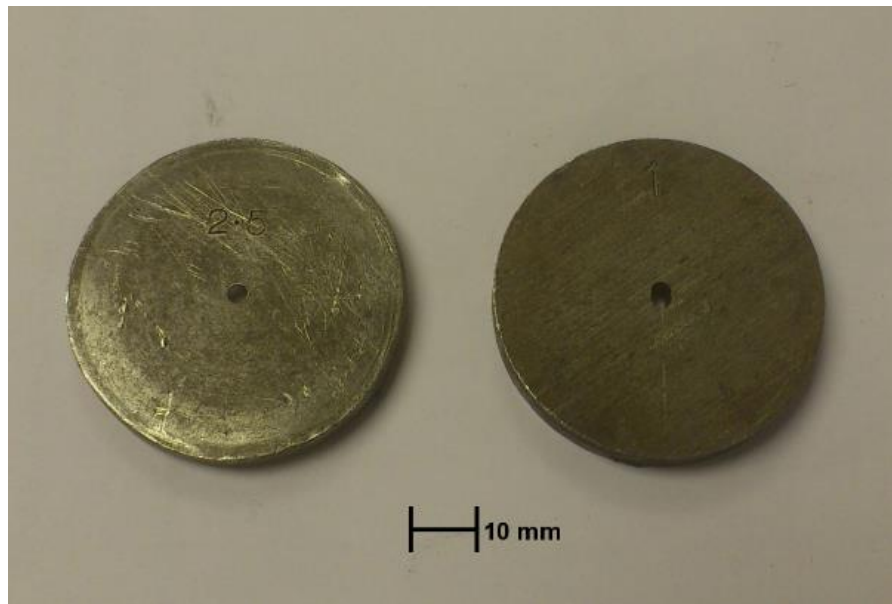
Display of extrusion dies used for manufacturing the three hybrid O-rings, the oval shaped die was used to make both the vertical and horizontal oval LRCM insert.
